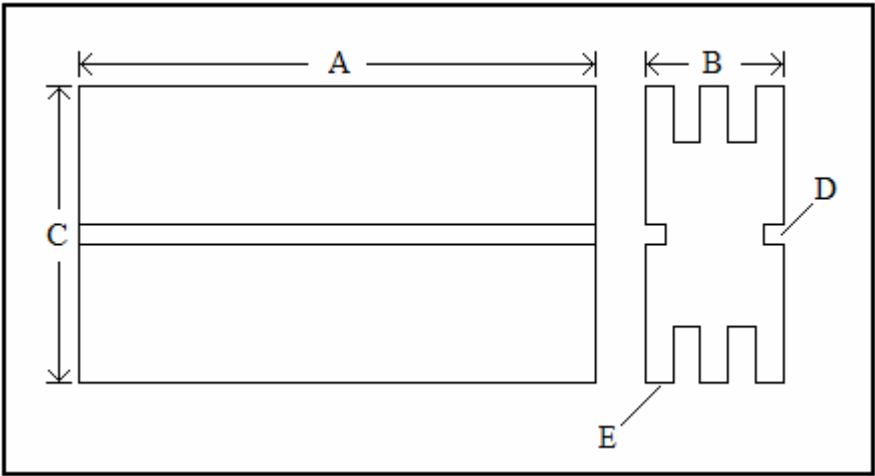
Detailed drawing of PVD coated surface grinding block
